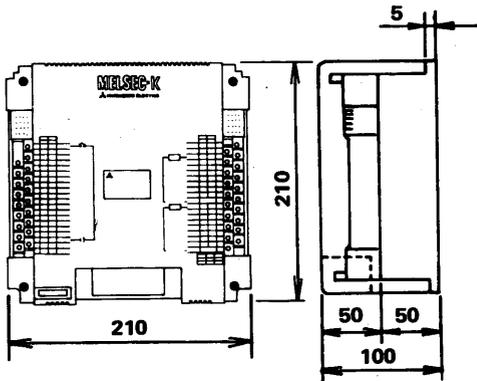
External Dimensions of E32 Extension Unit
